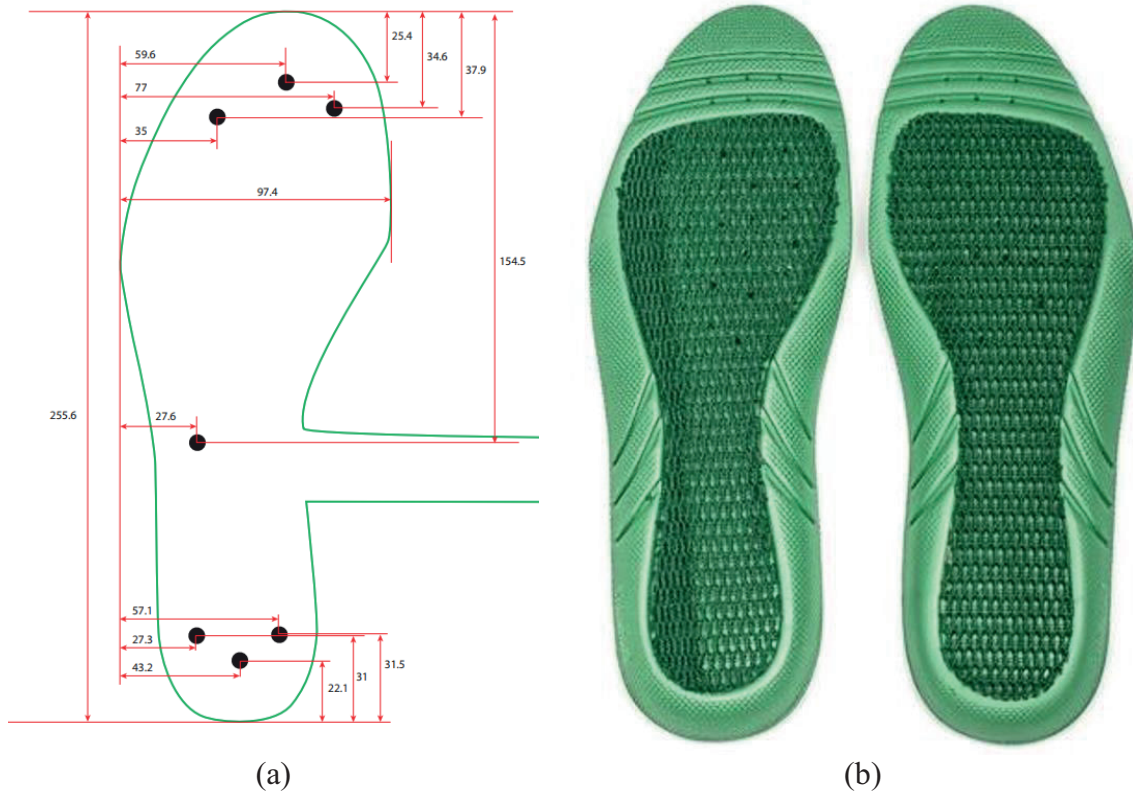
(a) Pressure sensor measurements; (b) 3D insole design.
